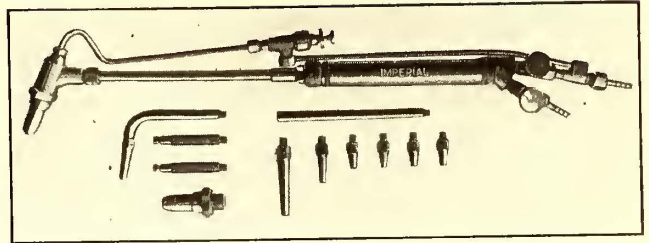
CUTTING ATTACHMENT IN PLACE ON TORCH
